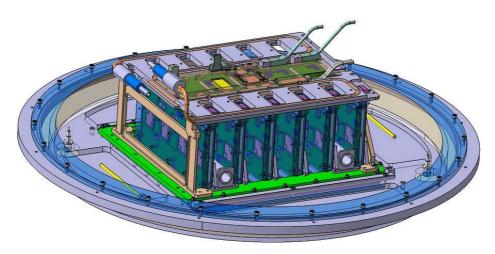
The Micromegas Module, complete of six FEC cards, one FEM cards and the cooling system, mounted on the TPC endplate.
